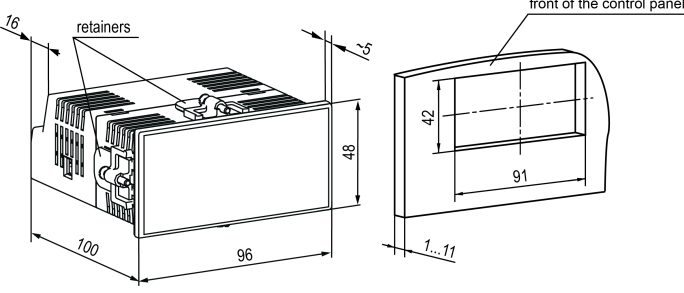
Dimensions of P2 enclosure and mounting cutout
